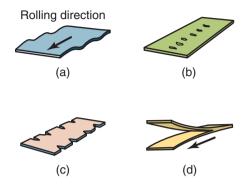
Schematic illustration of typical defects in flat rolling: (a) wavy edges; (b) zipper cracks in the center of the strip; (c) edge cracks; and (d) alligatoring.
